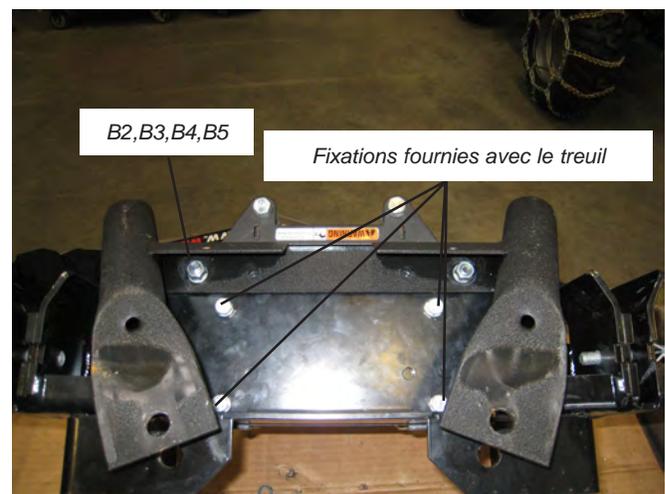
Install Front Fasteners - Bottom view of plow mount assembled to bumper
